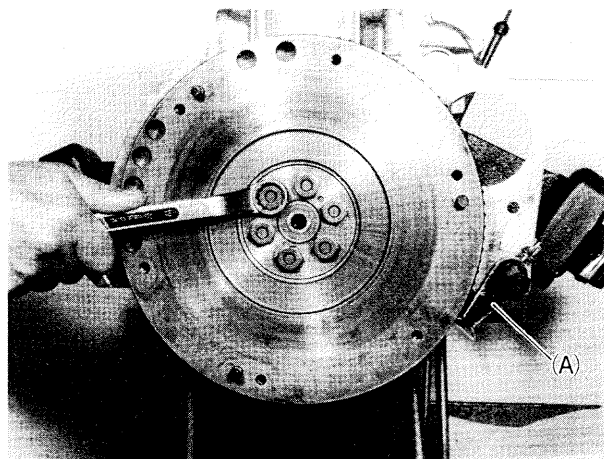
(A) Flywheel holder (Special tool 09924-17810)
